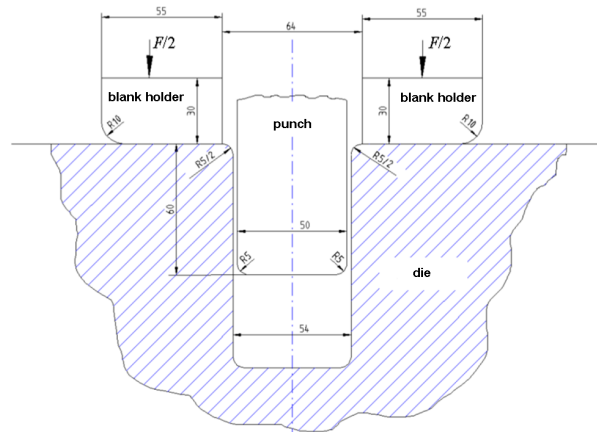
Section through the experimental setup of the strip drawing test (Krasovskyy, 2005).
